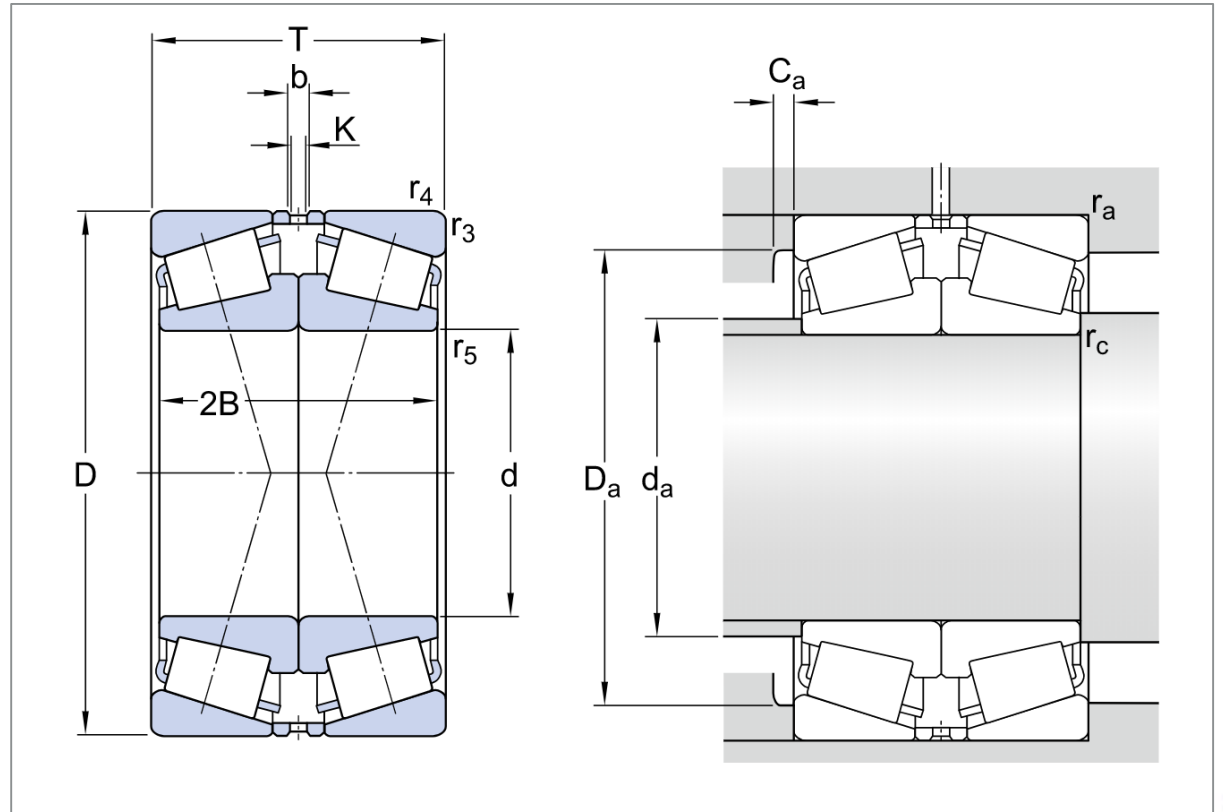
Bearing General Arrangement Drawing (SKF 2020).
